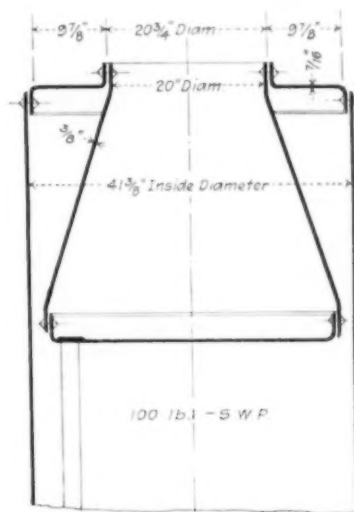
DESIGN OF TOP HEAD OF VERTICAL SUBMERGED-TUBE TYPE OF FIRE-TUBE BOILER
